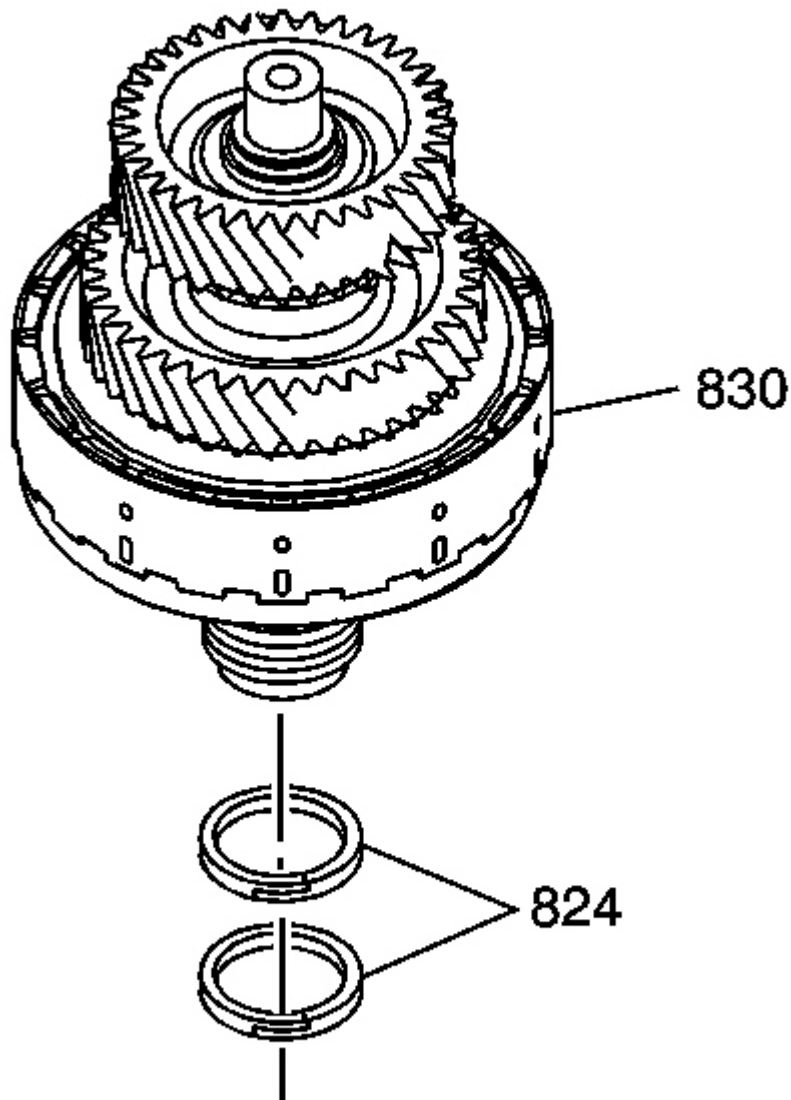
3rd Clutch Shaft Fluid Passage Seals & 3rd Clutch Shaft
